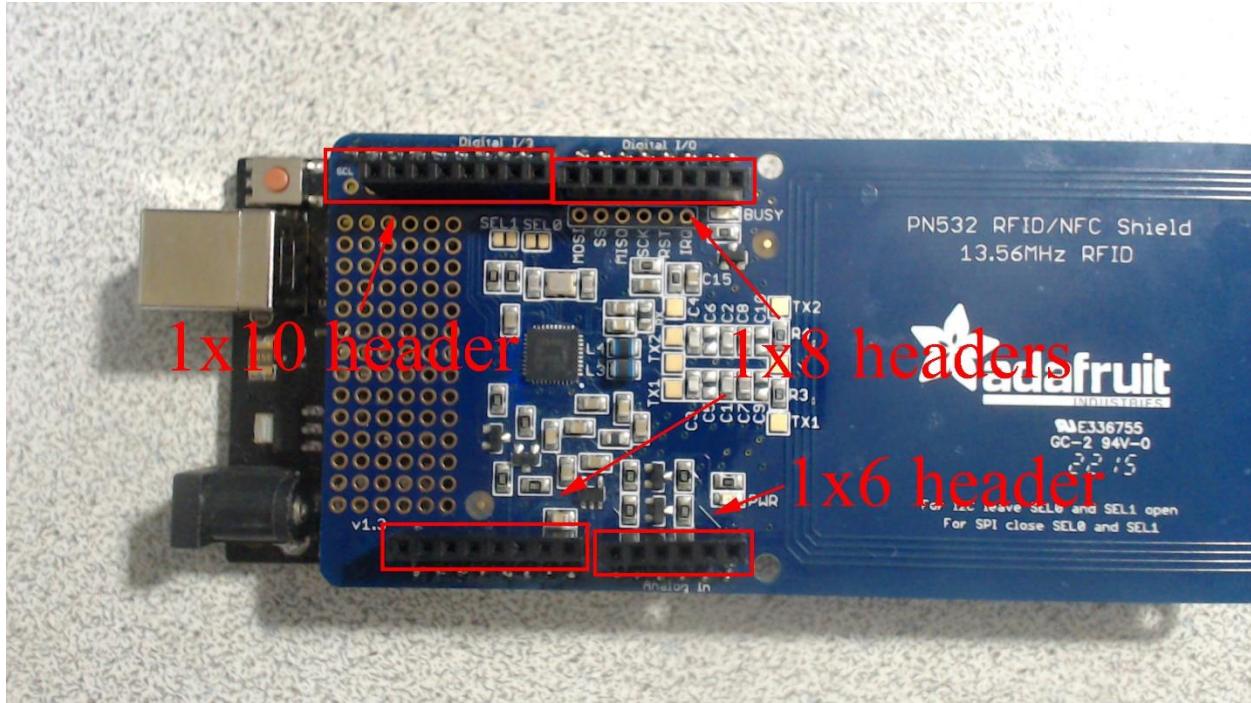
Layout of female-to-male headers on Adafruit PN532 shield
